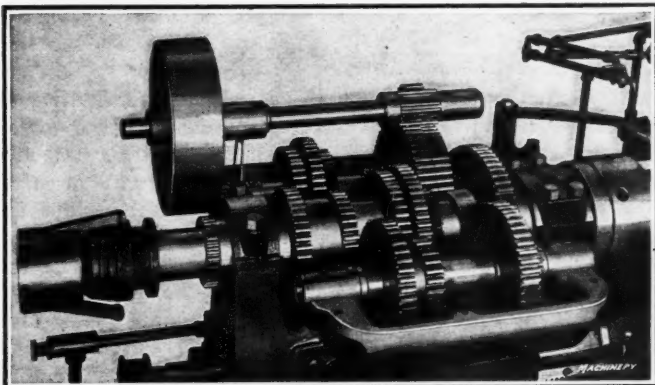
Arrangement of Gears in Head—Cover removed to show Mechanism
